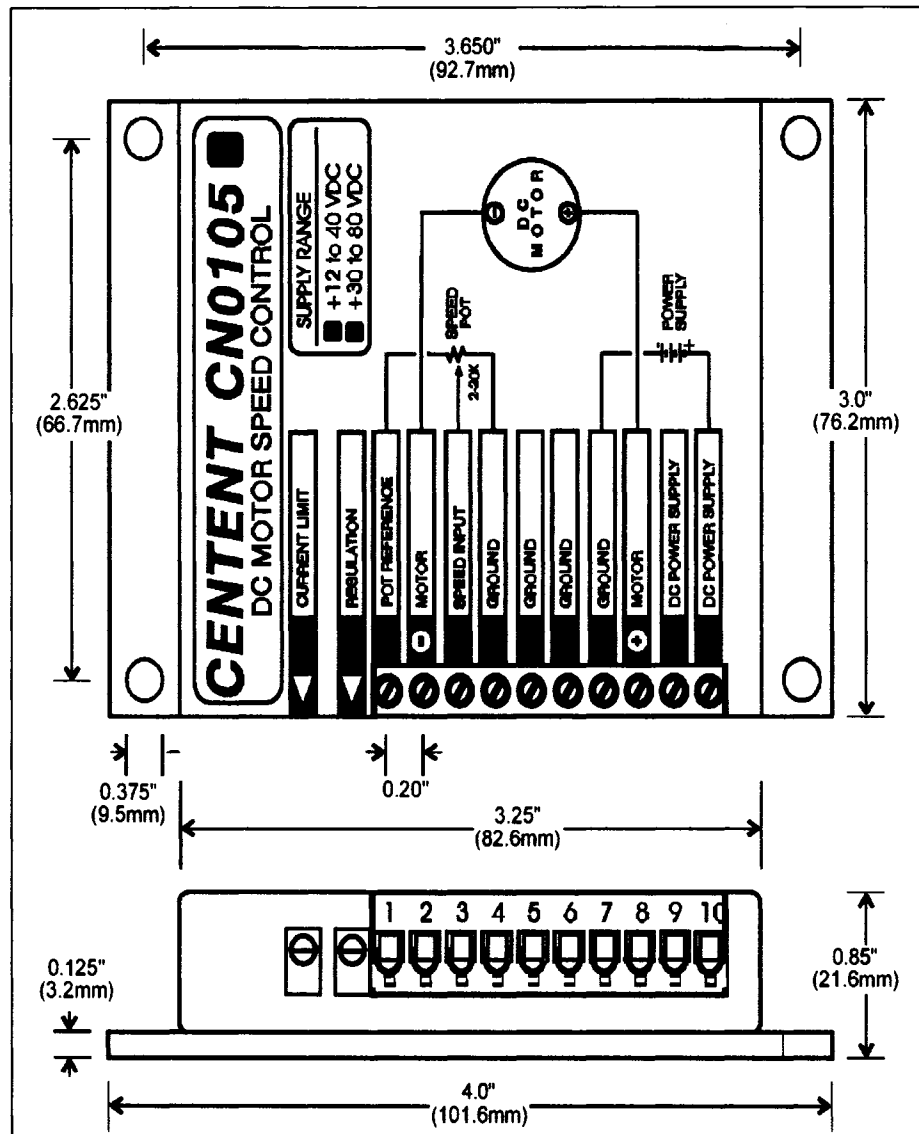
Centent CN0105 DC Motor Controller Drawing
